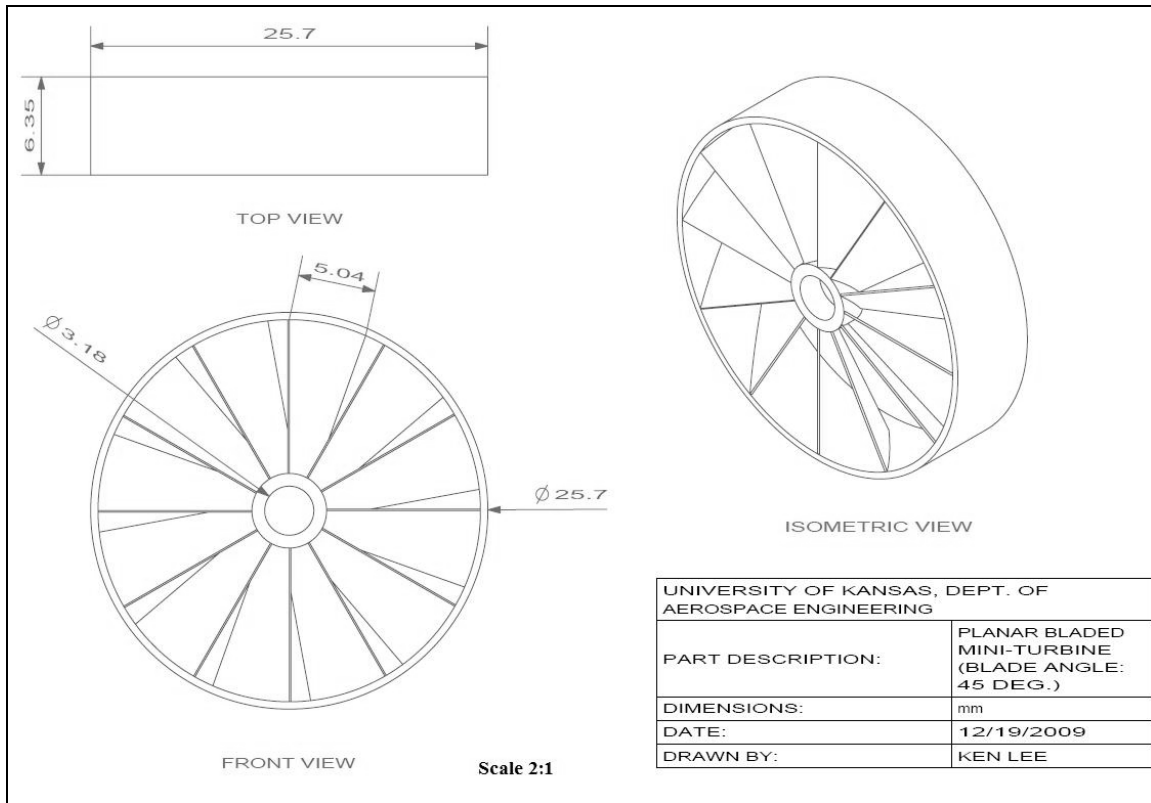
CAD Diagram of the Planar Bladed Mini-Turbine Drafted in UG NX 6.0.
